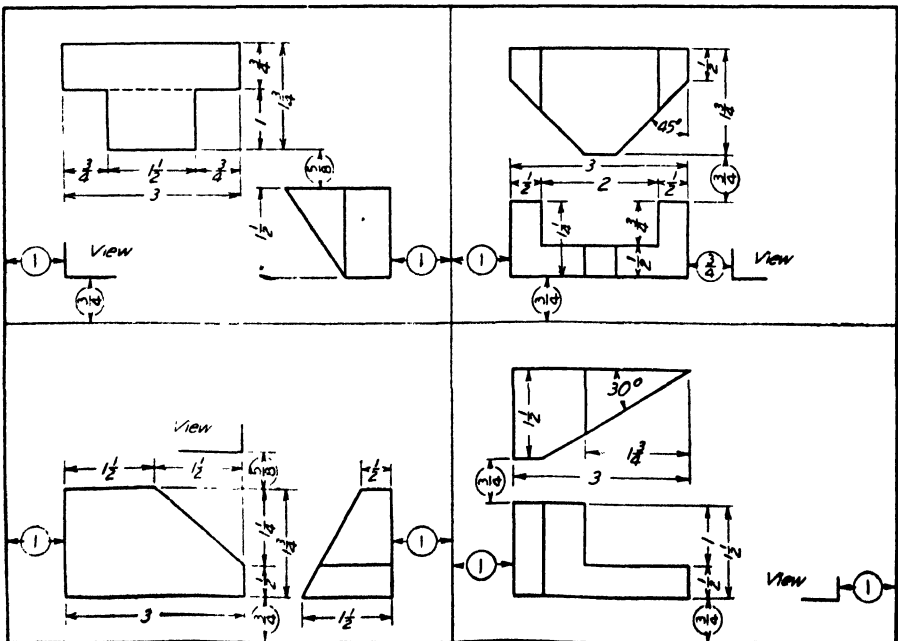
Probs. 87 to 90. Draw three complete views of each angle block.
